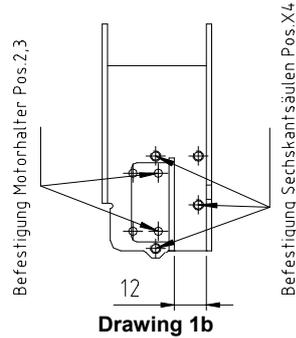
shows the position of the completed gear box – as installed in the hull – viewed from above. Parts supplied with the conversion kit have only a single number in the drawings and no further identification. The parts, marked with a prefixed X belong to the original gearbox. Positions with a prefixed A mark the different sub-assemblies of the different axles. Arrows “B” and “C” point the direction of view onto gearbox when necessary. We will refer to this later.
